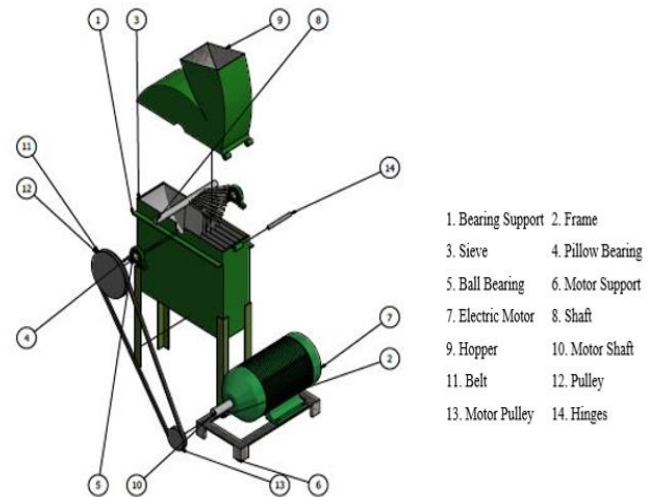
Exploded View of the Leafy Vegetable Slicing Machine
